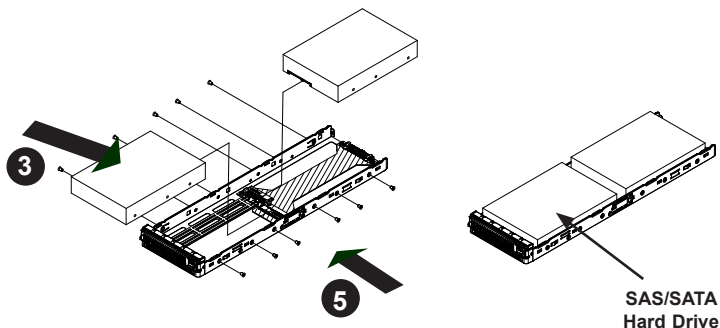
Installing 3.5" Hard Drives into the Hard Drive Carrier
